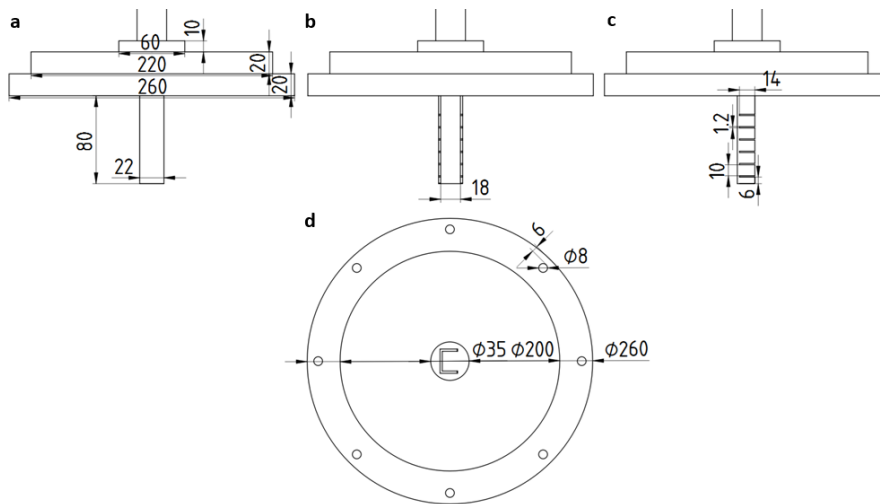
Technical drawing depicting the garage viewed from the a) left, b) right, c) back, d) bottom. Units of length are in millimeters.
